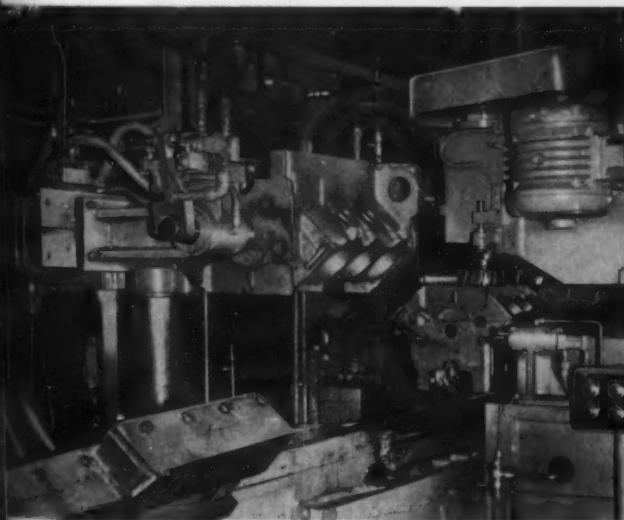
At the unloading end of the milling machine (Fig. 1), the blocks are rotated through 180 degrees to dump the chips.
